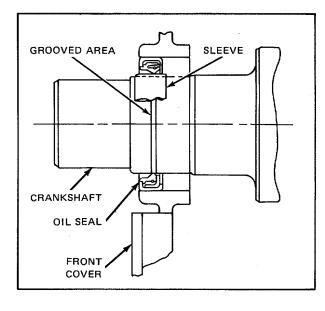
Use of Front Oil Sleeve on Grooved Crankshaft
